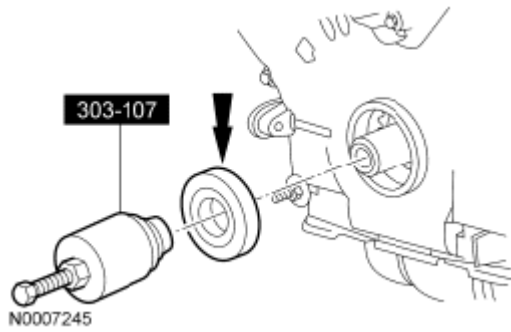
Removing Crankshaft Front Seal Using Crankshaft Front Oil Seal Remover
